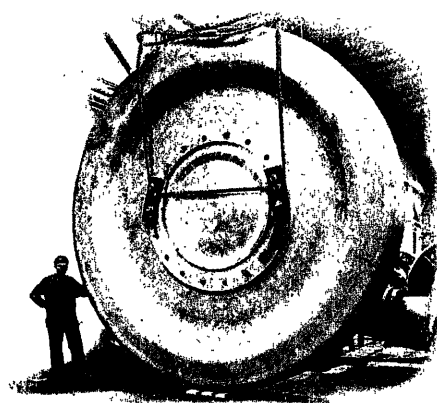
Flywheel of motor generator set for reversing rolling mill motor at Domnarvet.
